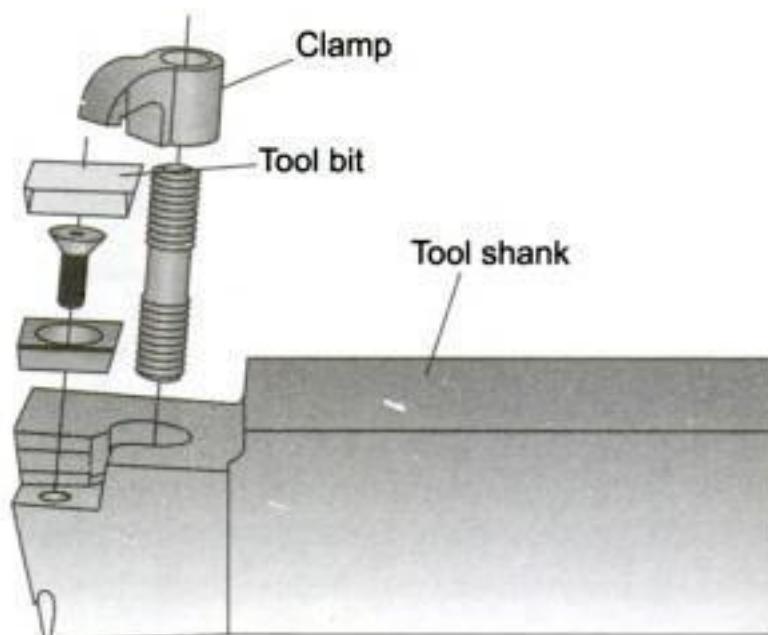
Construction of a Tungsten carbide turning tool (courtesy Seco Tools).
